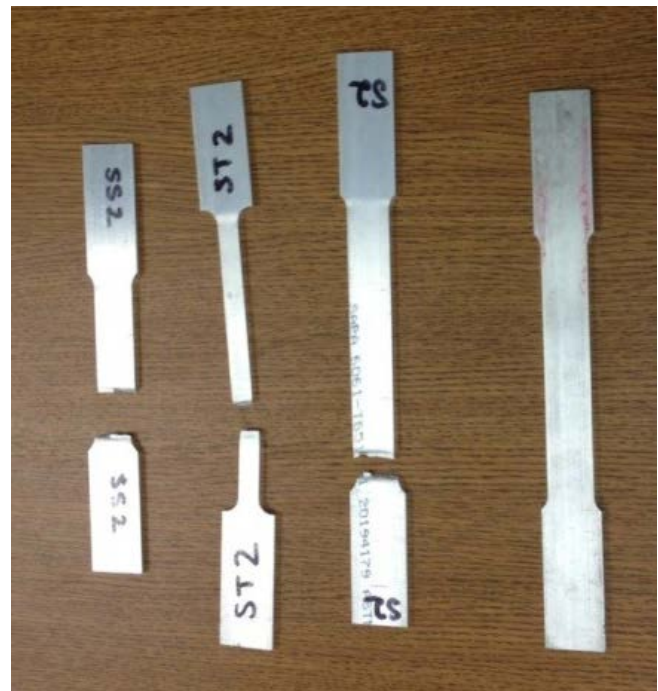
Aluminum 6061-T6 tensile specimens before and after failure.
